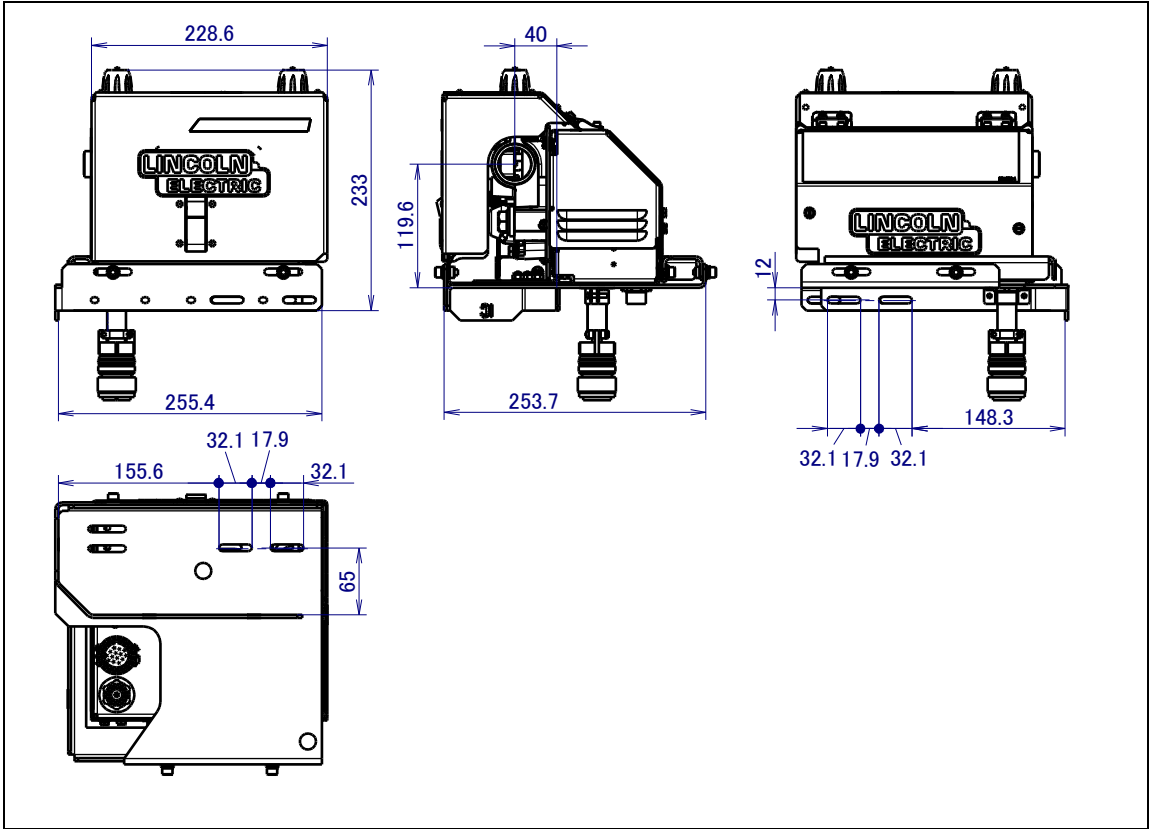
(a) Wire feeder external dimensions (A05B-1291-H203)
